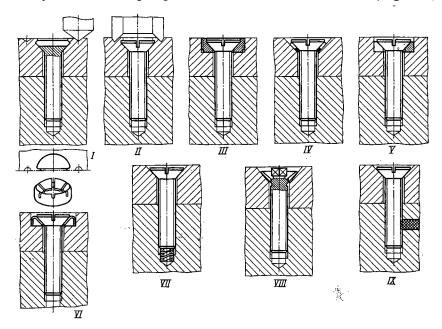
Locking countersunk head machine screws I—by notching part material round the head; II—by fluting part material round the head; III—by deformable ring; IV—by tooth lock washer; V—by split spring ring, VI—by spring washer; VIII—by helical ring; VIII—by elastic collar integral with screw head; IX—by elastic insert
